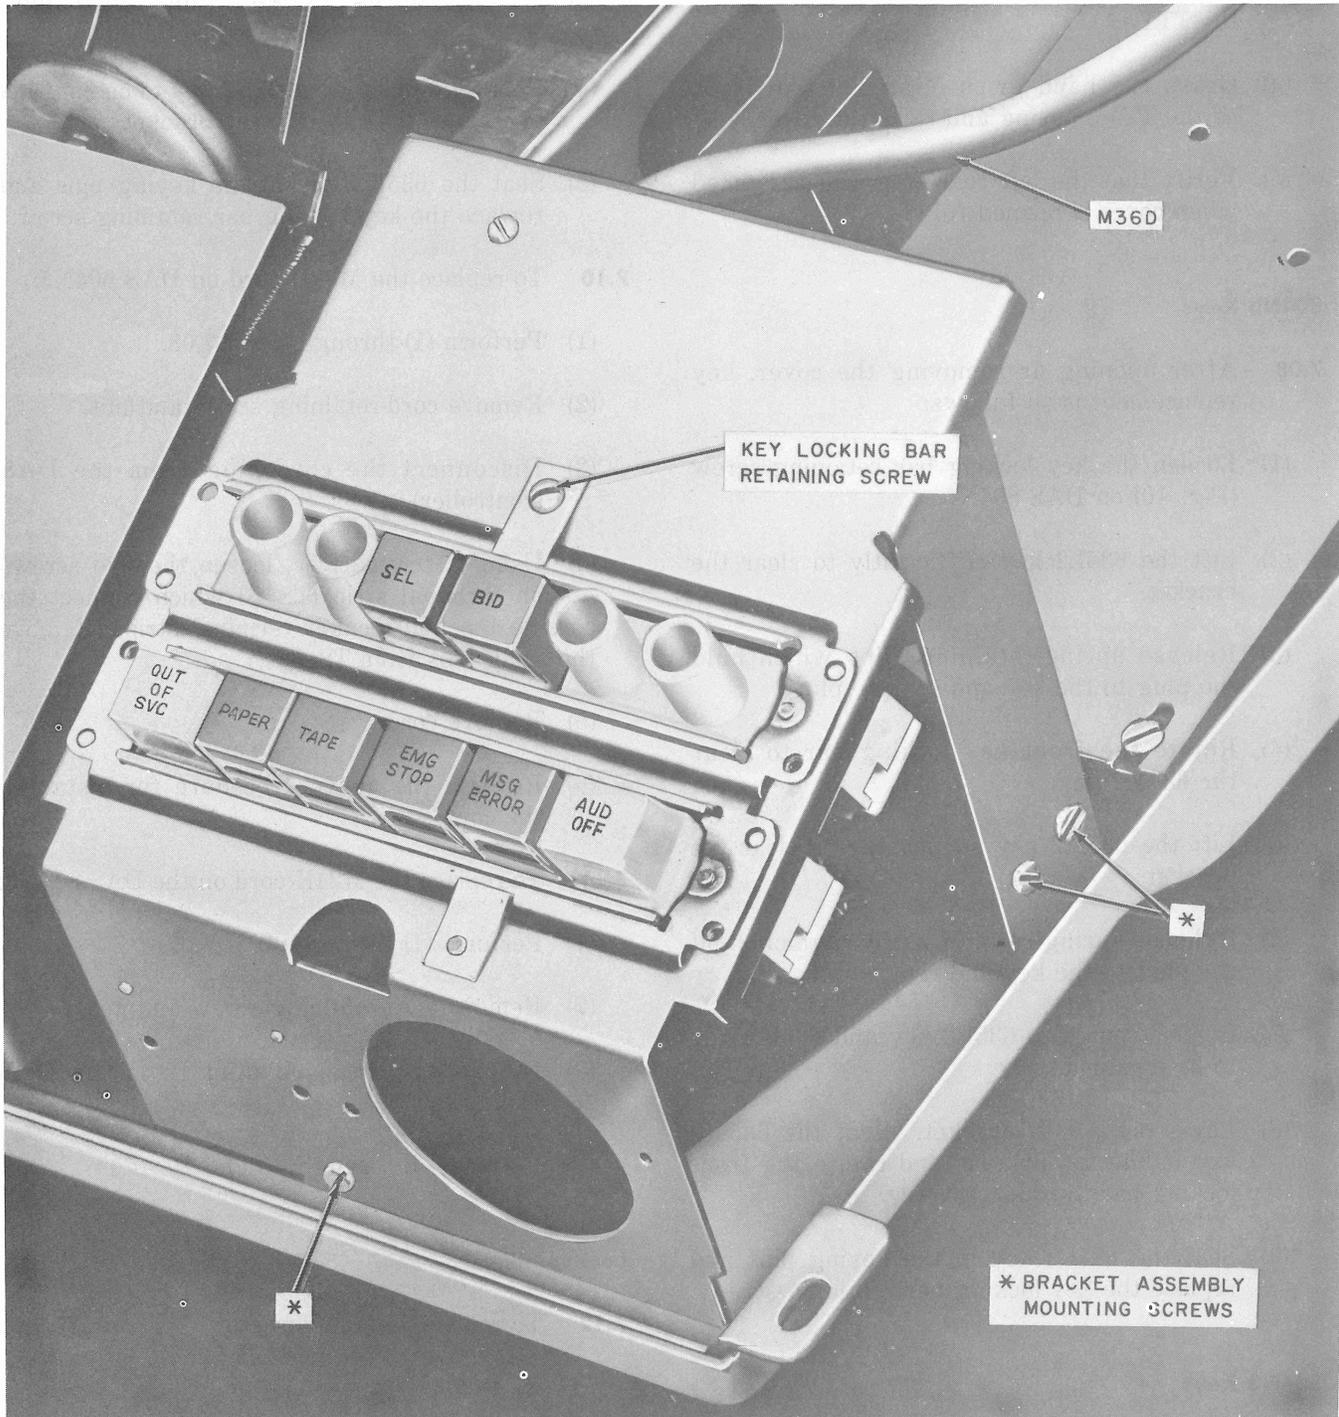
DAS 804N5 Mounted in a 35 ASR TTY Showing Mounting Screws and Key Retaining Screws
